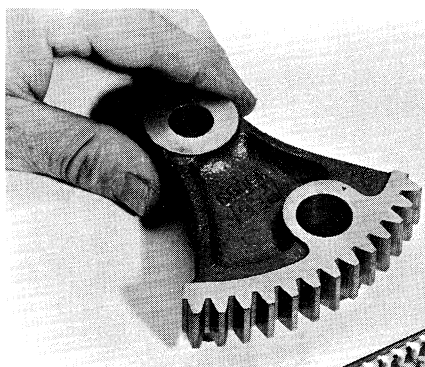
A Naloy slab broach that produces the finished teeth on a cast iron sector gear in one pass.
